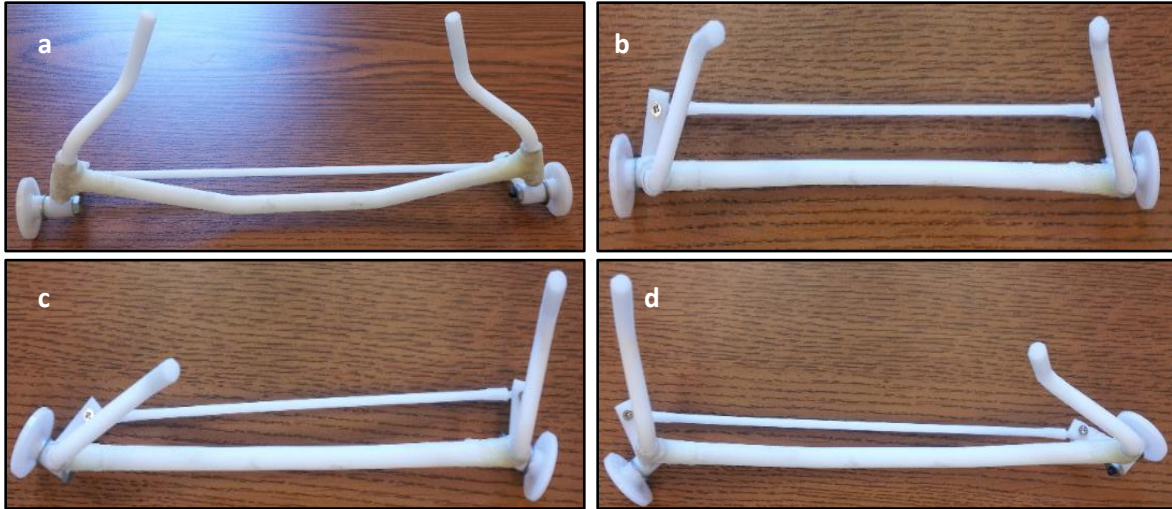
Prototype of steering system showing different movements: a) front view of steering system b) top view with wheels straight c) top view with wheels turning right c) top view with wheels turning left.
